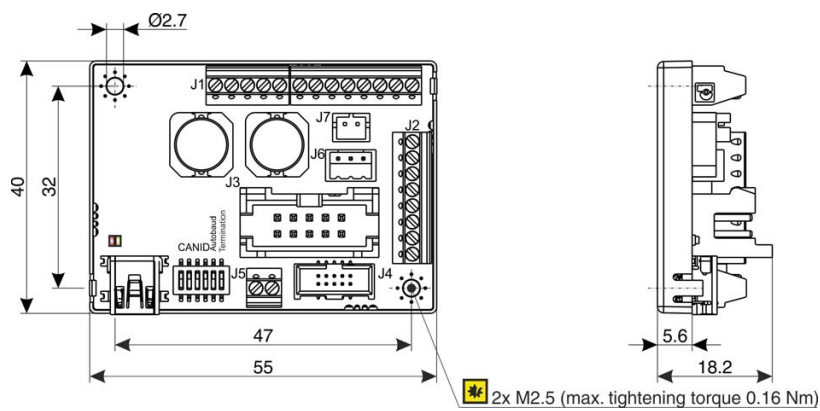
Dimensional Drawing [mm] – DCX (530239)
